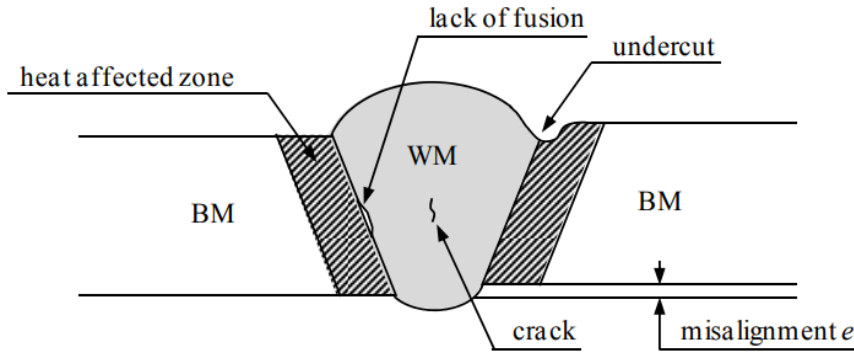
Schematic representation of a typical girth weld containing defects [9].
